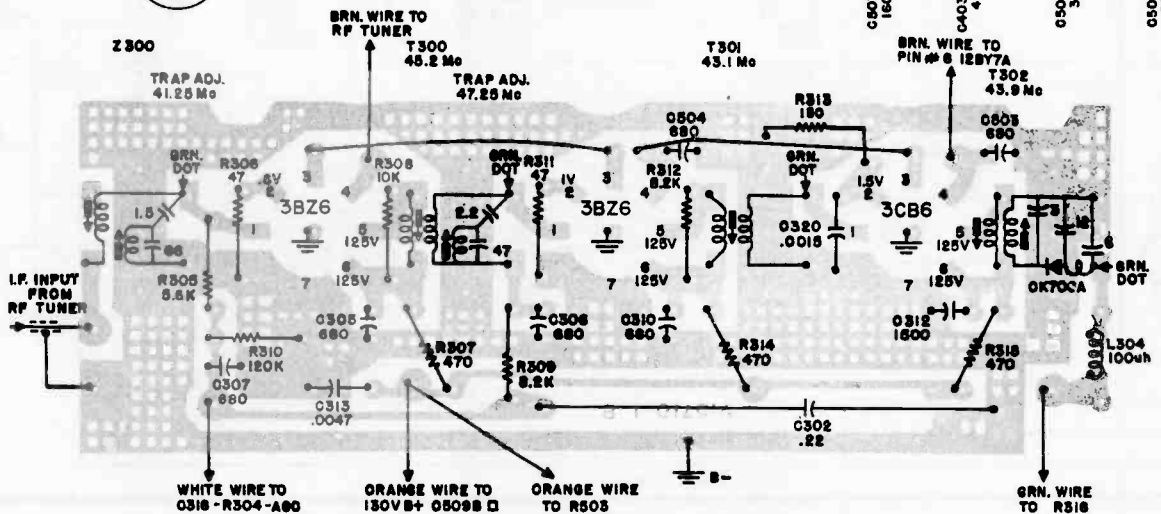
Bottom View of IF Printed Board Showing Top Components Symbolically
